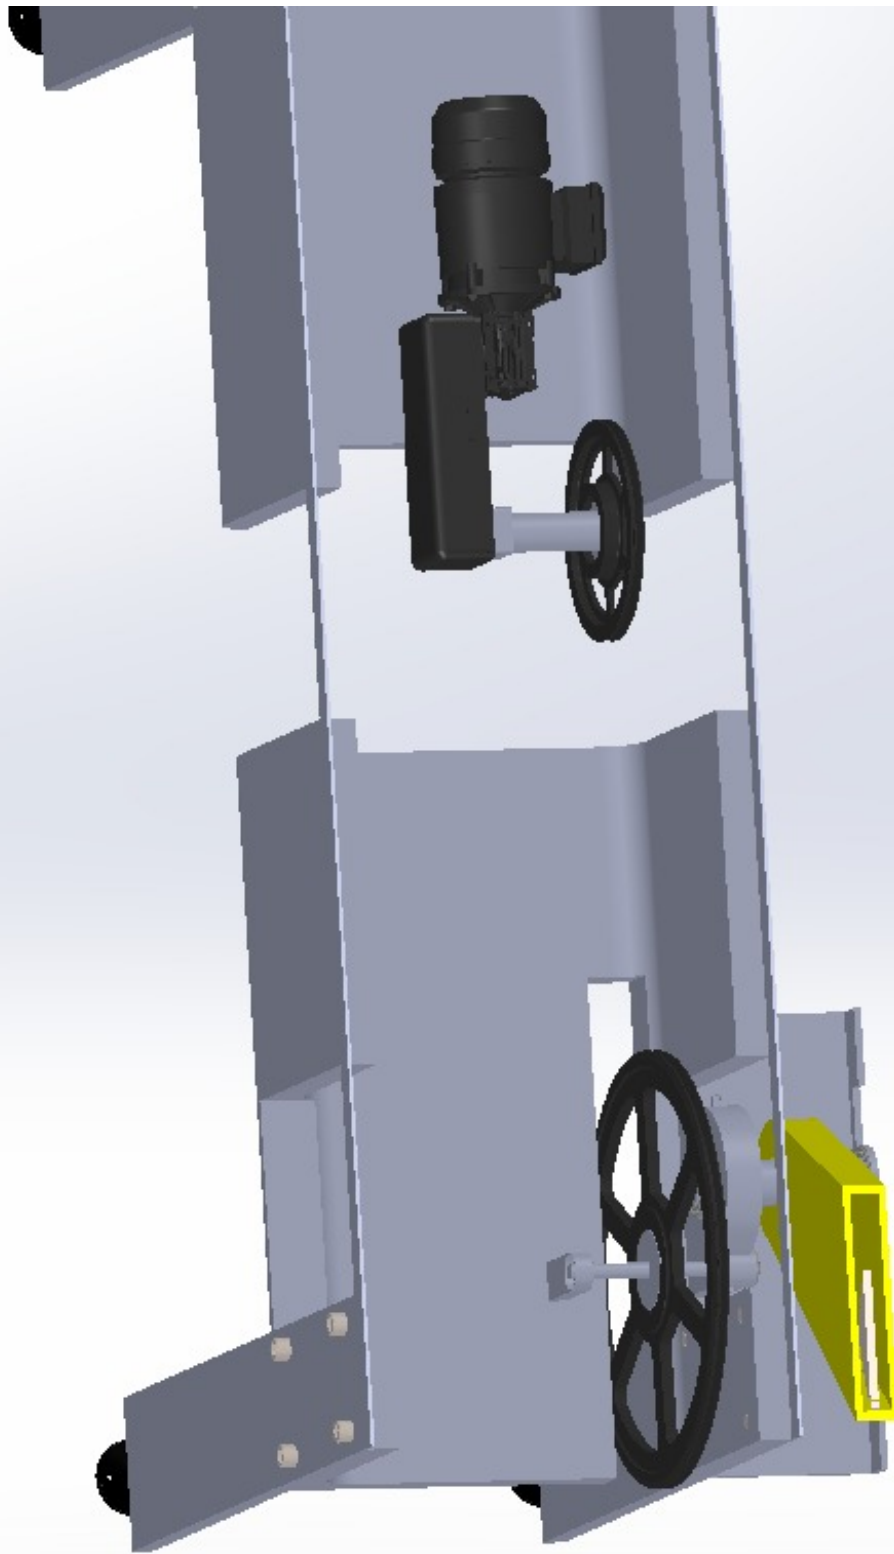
Section of Top View to Further Show Motor and Pulley Alignments.
